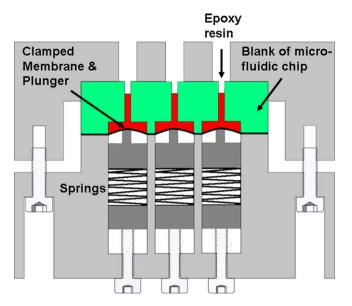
Assembly tool for prototype version of the microfluidic chip with moulded pump chambers.
